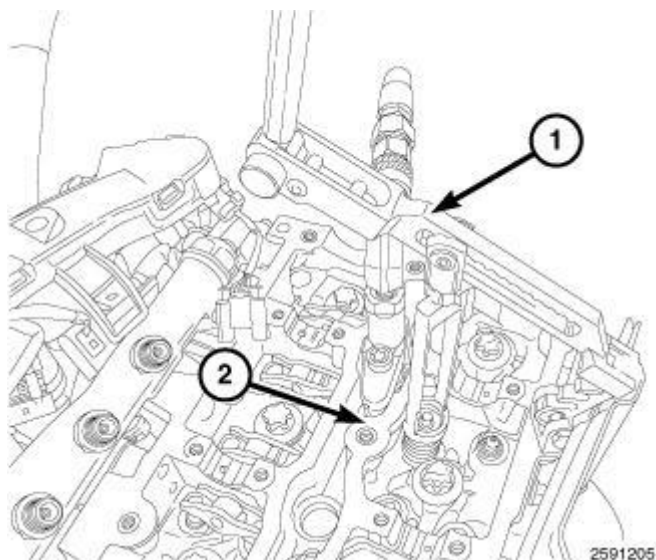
Valve Spring Compressor & Cylinder Head
